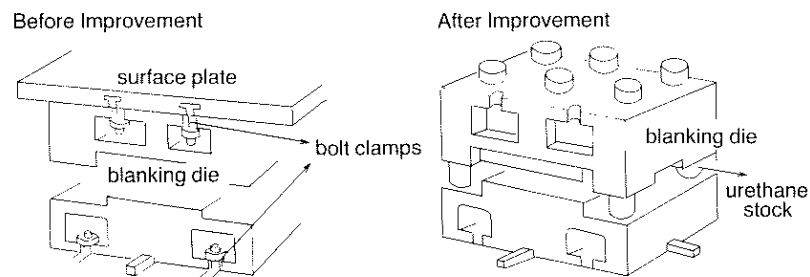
Improved Setup by Means of a Feed Line Blank Die Strike Die
